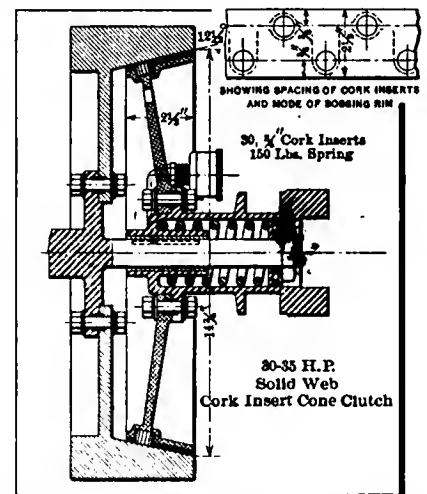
"Cork Insert" clutch, of the cone type, made by General Manufacturing Company for many car makers
